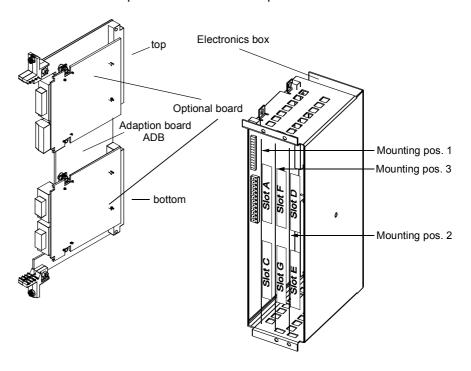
Adaptation board with optional boards and position of the slots for Compact units and chassis-type units
